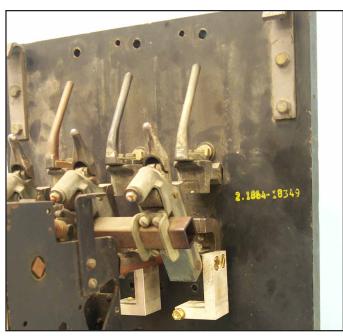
Overview: Top Copper Adapters Installed with the Breaker "Halves" Reassembled.
